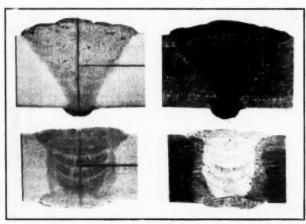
Cross-Section of Weld in 1-in. Plate (× 1).
